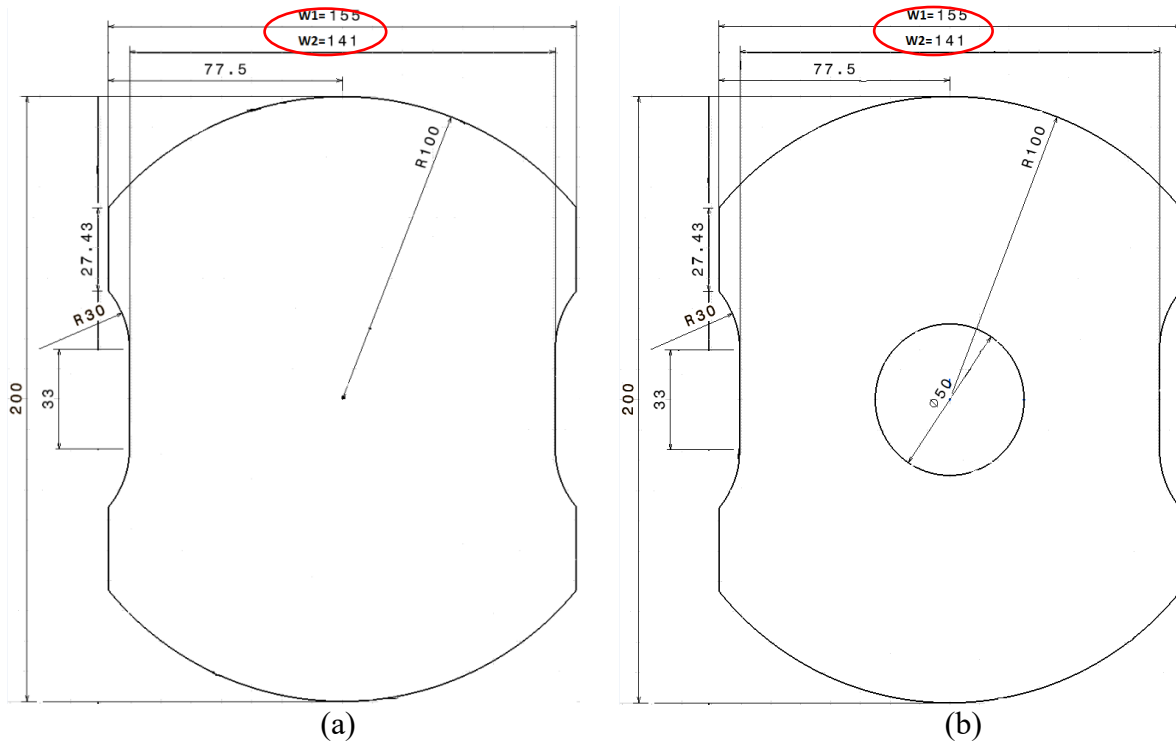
Schematic of the geometry of (a) the Marciniak test Blank and (b) the Blank carrier
